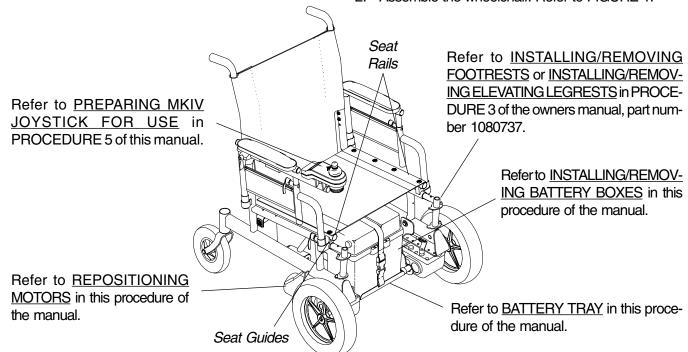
ASSEMBLING EXCEL - UNFOLDING/FOLDING - INTEGRATED SLING SEAT
